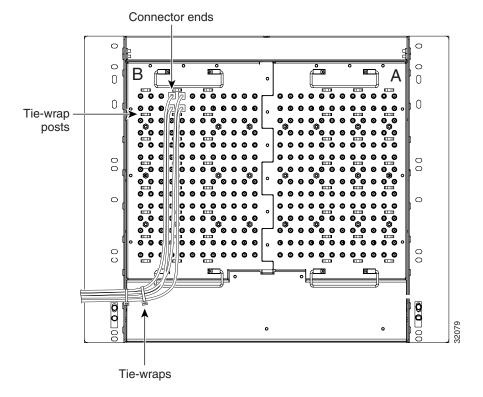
Routing Coaxial Cable (SMB EIA Backplane)
